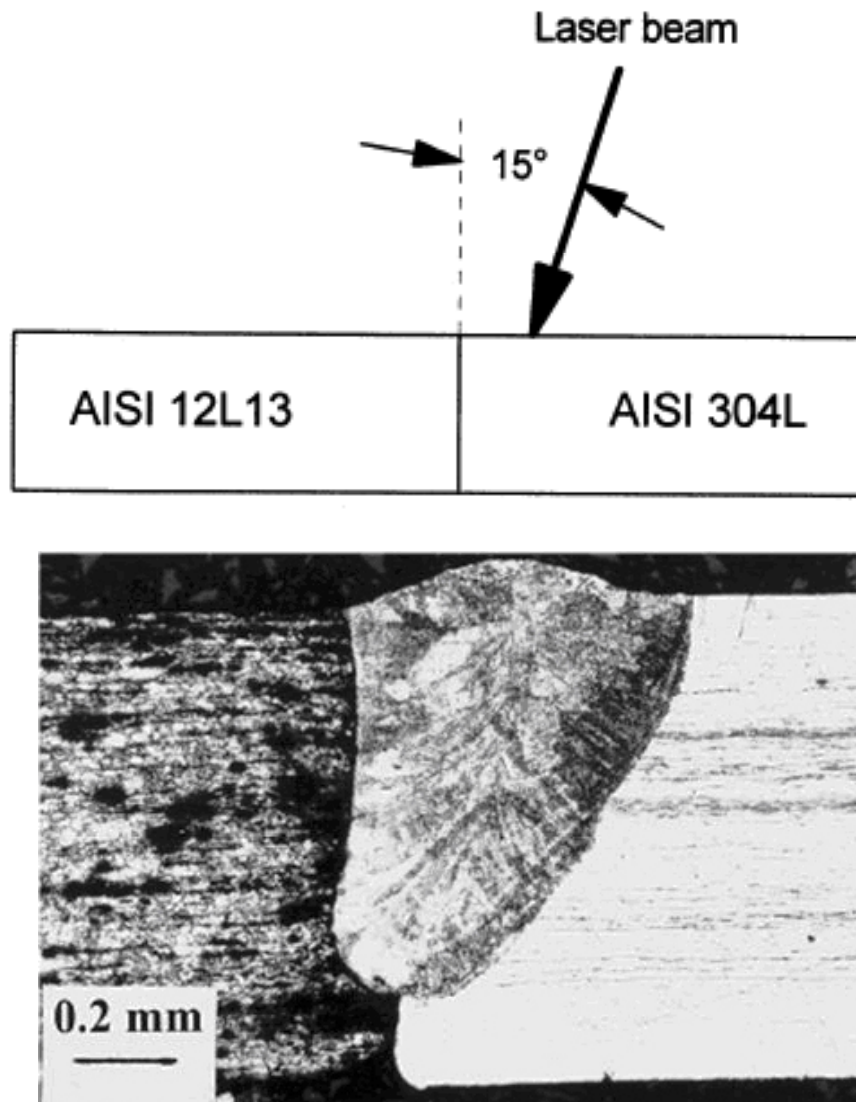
Showing that a laser beam with 0.12 mm offset towards AISI304L and tilted 15° with respect to the plane of the butt joint fit-up face used in autogenous butt welding (Li & Fontana, 1998)
